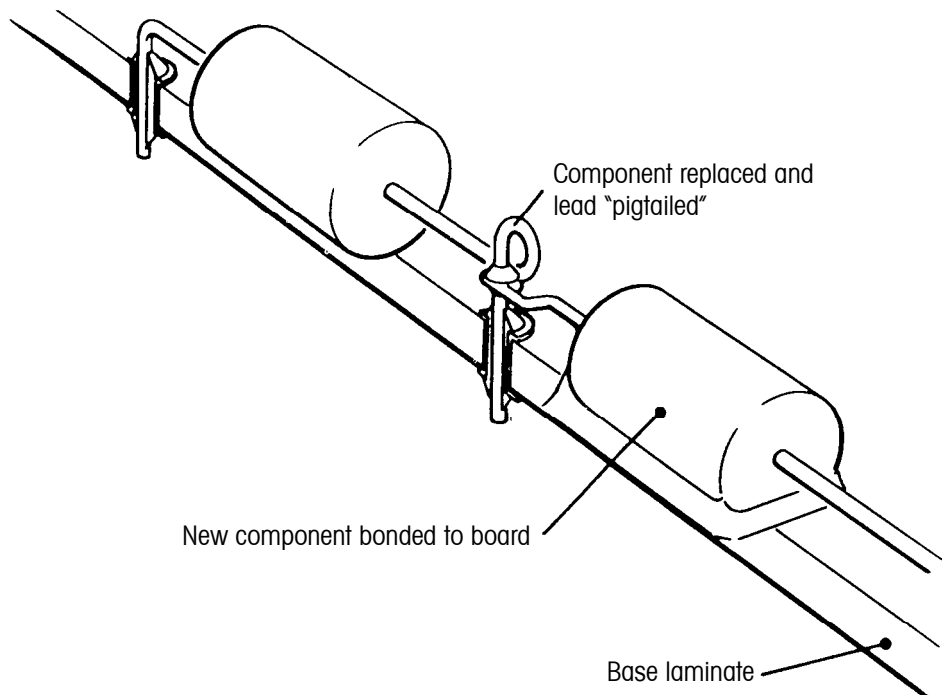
Mounting of additional component by linking to a "pigtailed" lead of an adjacent component
